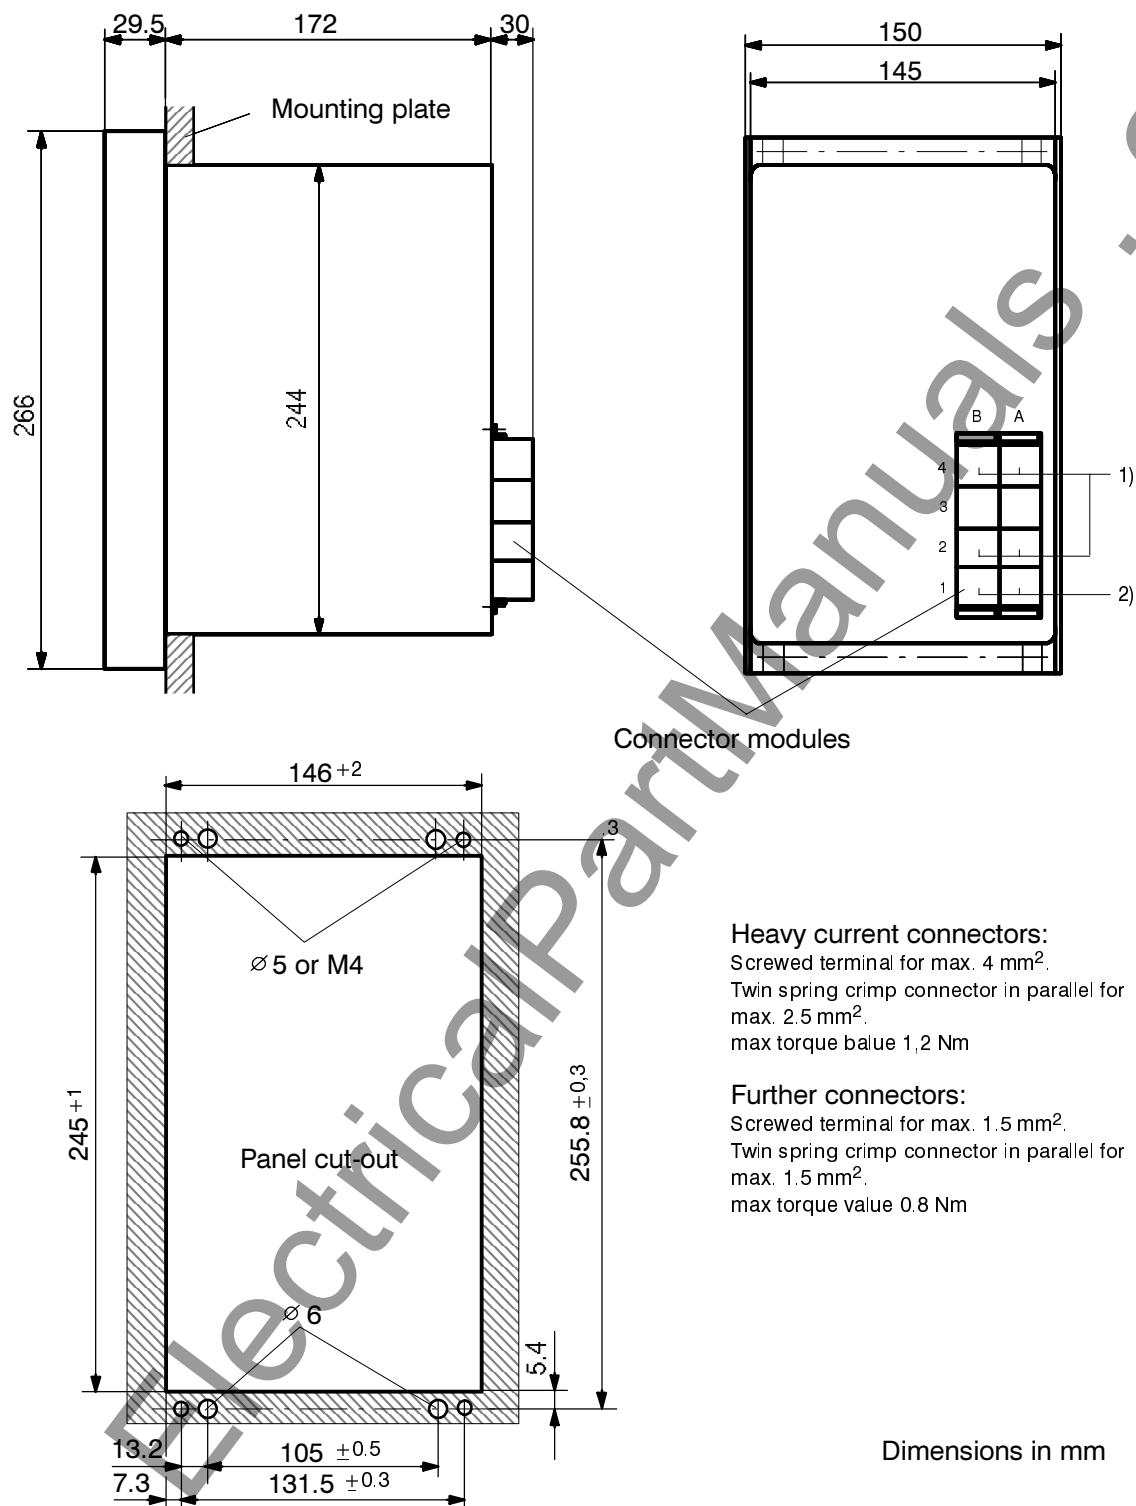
Dimensions coupling unit 7XR6100-0CA00 for panel flush mounting
